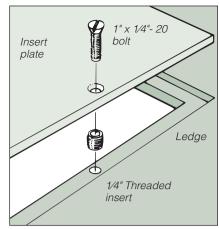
Use 1/4"-20 threaded inserts and 1"-long bolts to hold the interchangeable insert plates in place.
